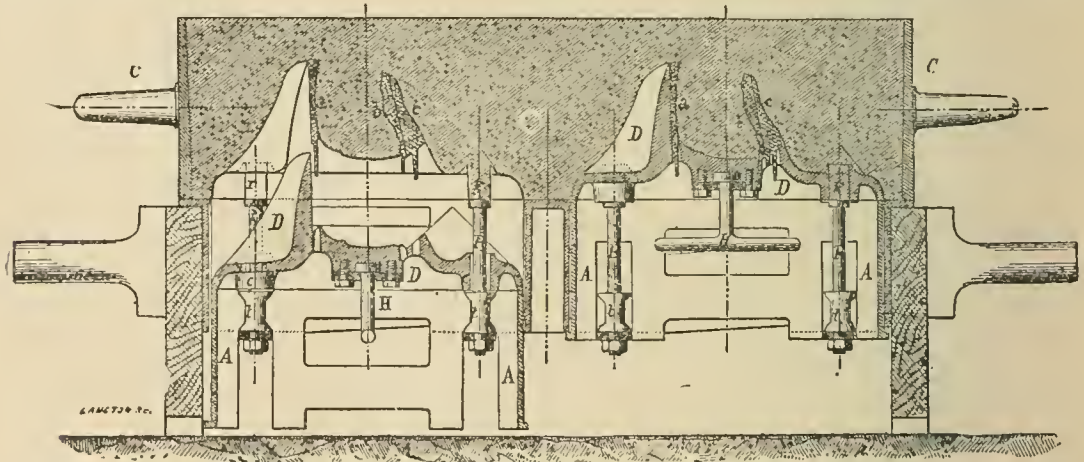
Arrangement of Patterns in casting Railway Chairs.
